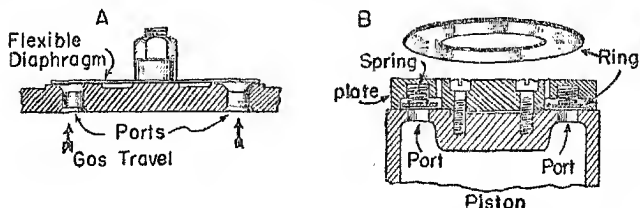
A Diaphragm Valve (A) and a Ring Valve (B) as Used in Compressors.
